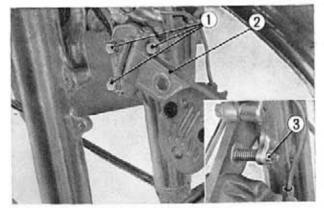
(1) Caliper setting bolts (3) Adjuster nut (2) Caliper assembly
